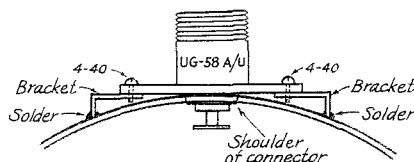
Mounting of the output probe on the outer cylinder of the 2300-Mc. oscillator.
